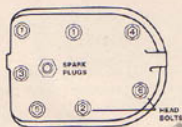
/38) 6 HP Tecumseh engine head bolt tightening sequence.)
